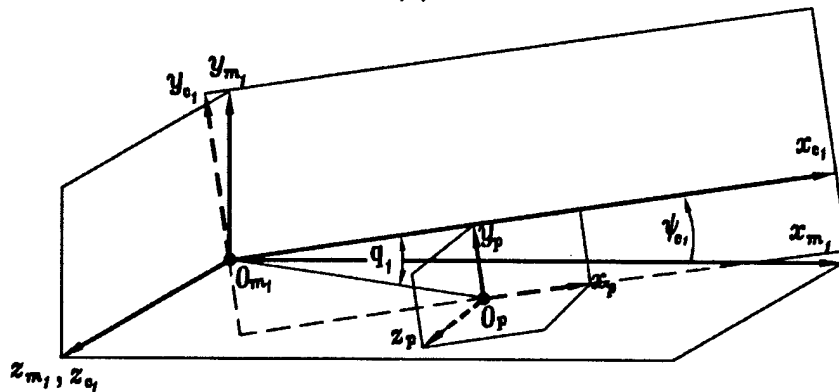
Machine tool settings for installation of the to-be-generated pinion.
